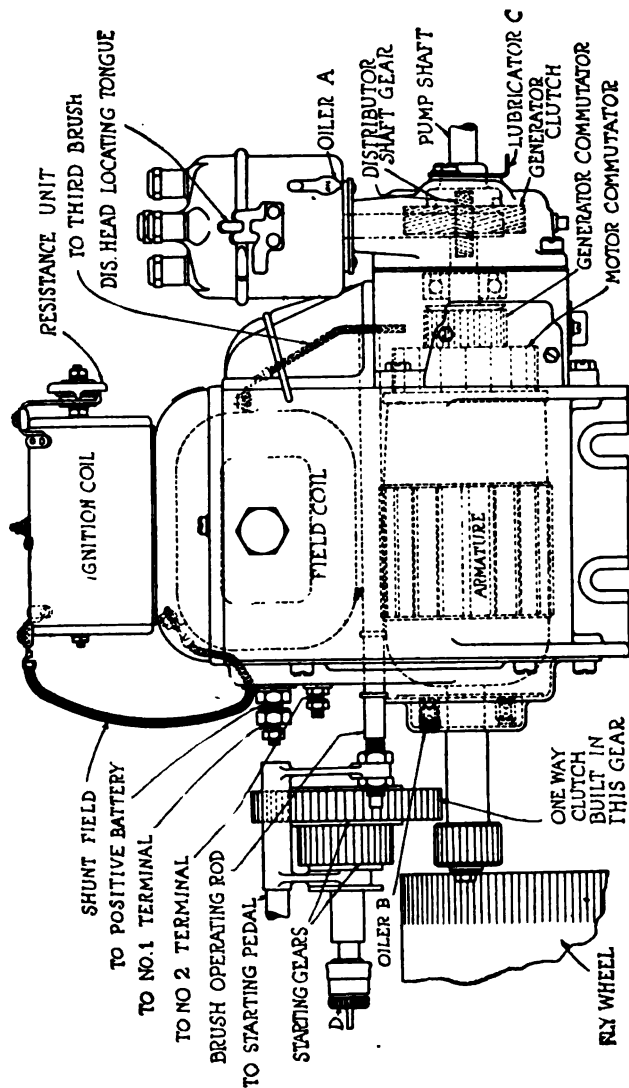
Side view of Delco electrical unit showing mechanical arrangement of parts
